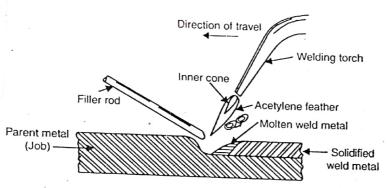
Oxy-Acetylene Welding.
